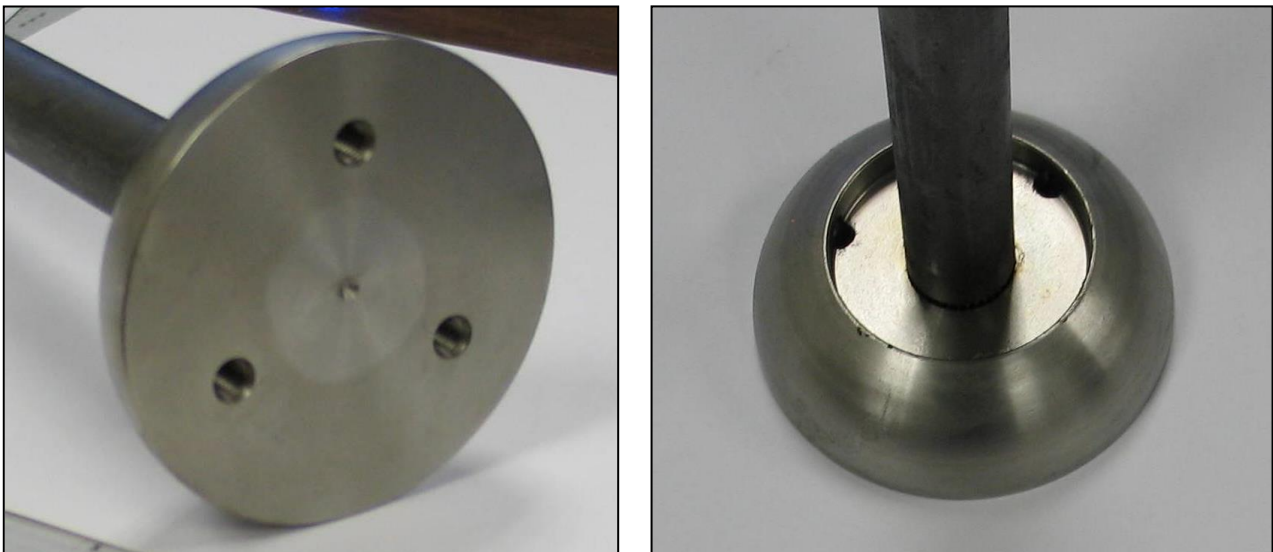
Welded and machined steering wheel hub face on left; back-side of steering wheel hub on right
